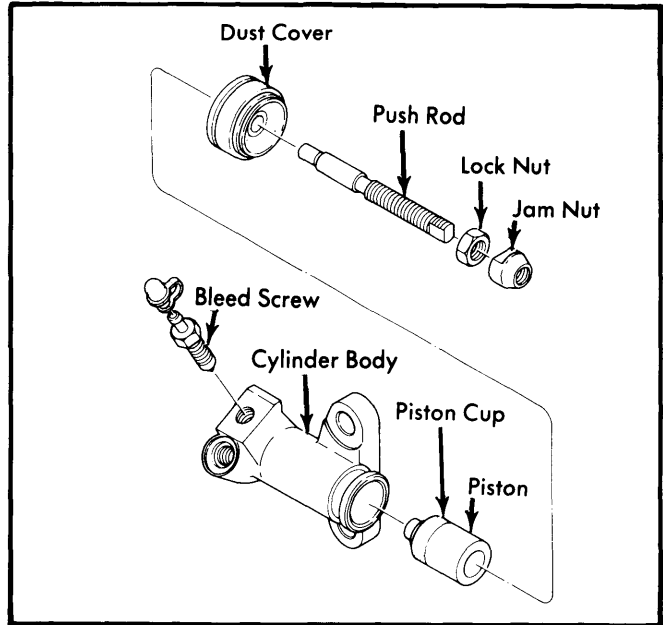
Exploded View of Clutch Slave Cylinder (B210 Models Shown)
